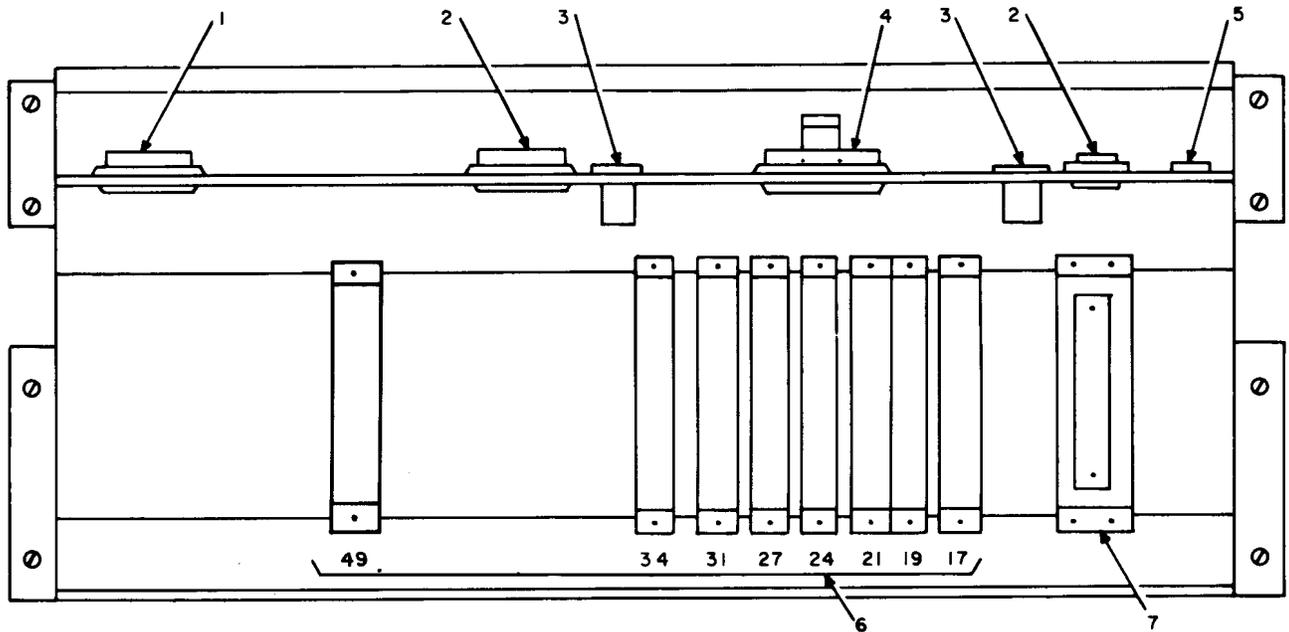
Rear View of Equipment Shelf in a 950B Testboard
